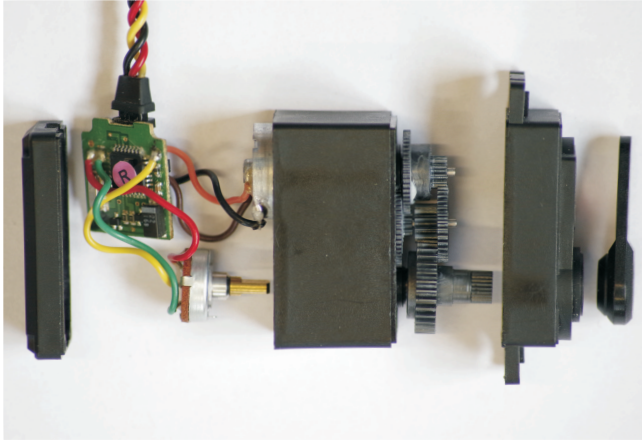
Exploded view of a servo motor, consisting of electronics board, motor, gear, crank arm and potentiometer.
